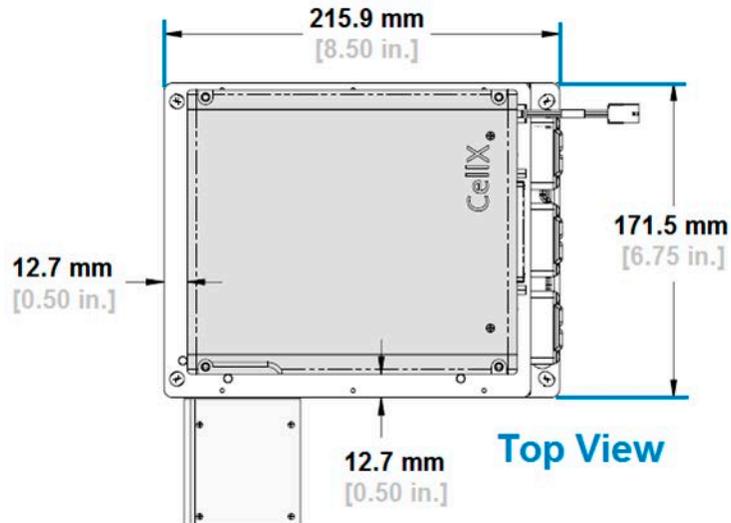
Dimensions – Fan-Cooled Heat Sink, Top View
